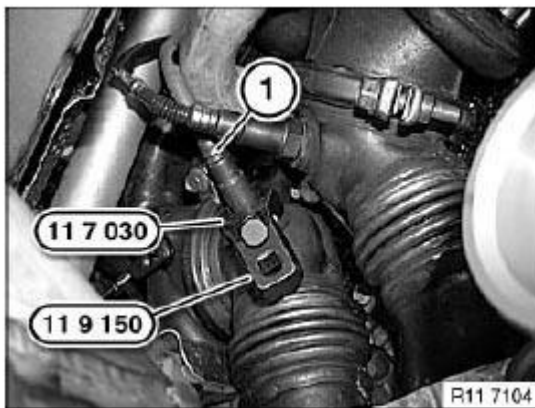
Releasing Oxygen Control Sensor With Special Tools (11 7 030) And (11 9 150)
